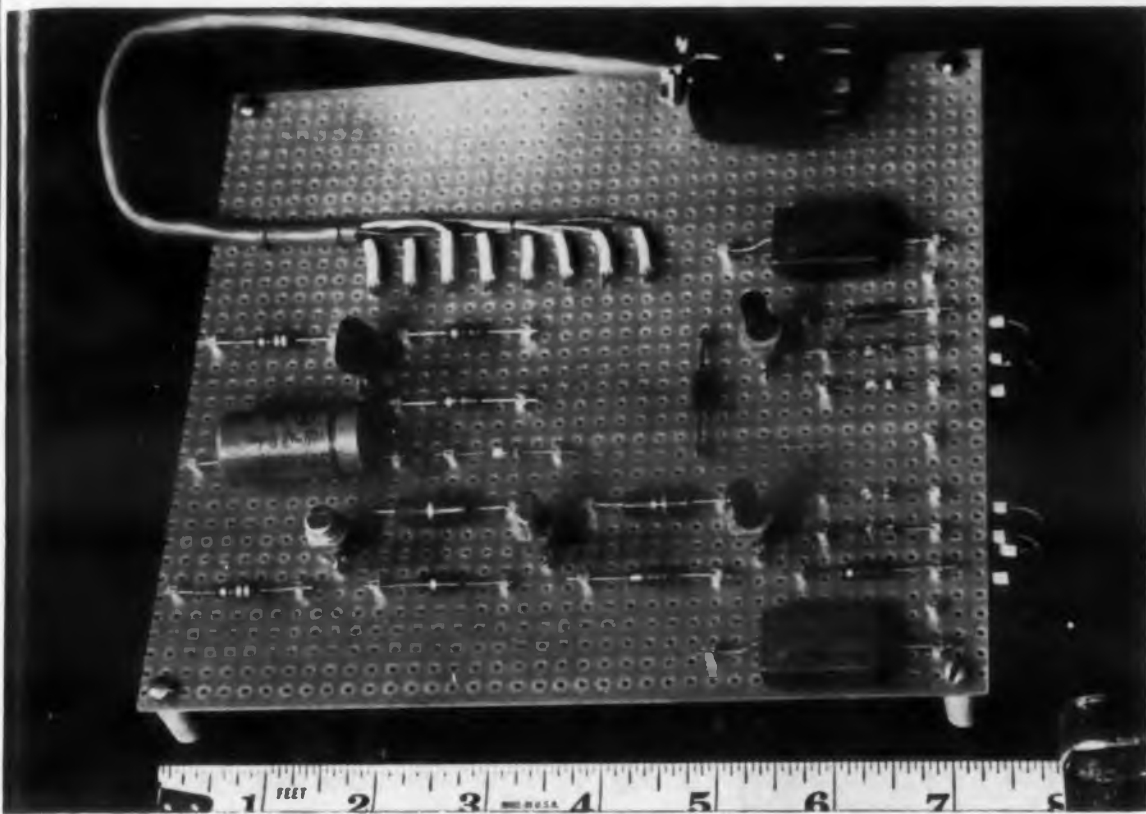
The components of a test circuit mounted in their final positions. Plug at rear is for connecting the power supply.
